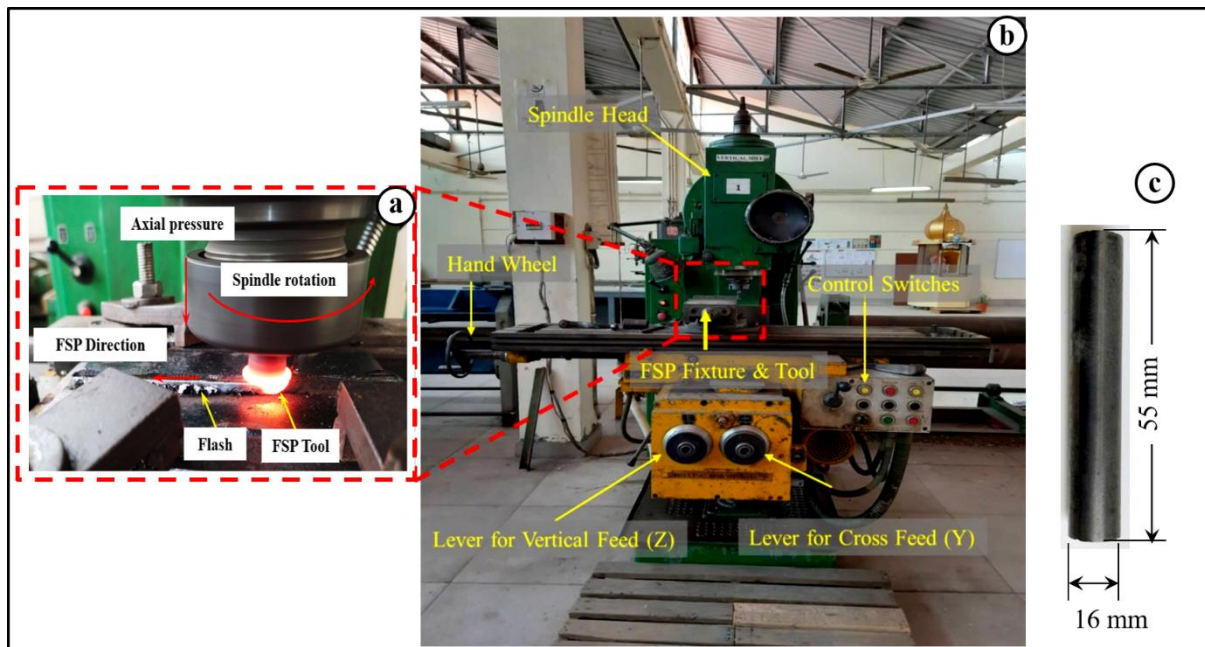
The details of FSP setup showing; (a) FSP, (b) vertical milling machine and (c) tool used
